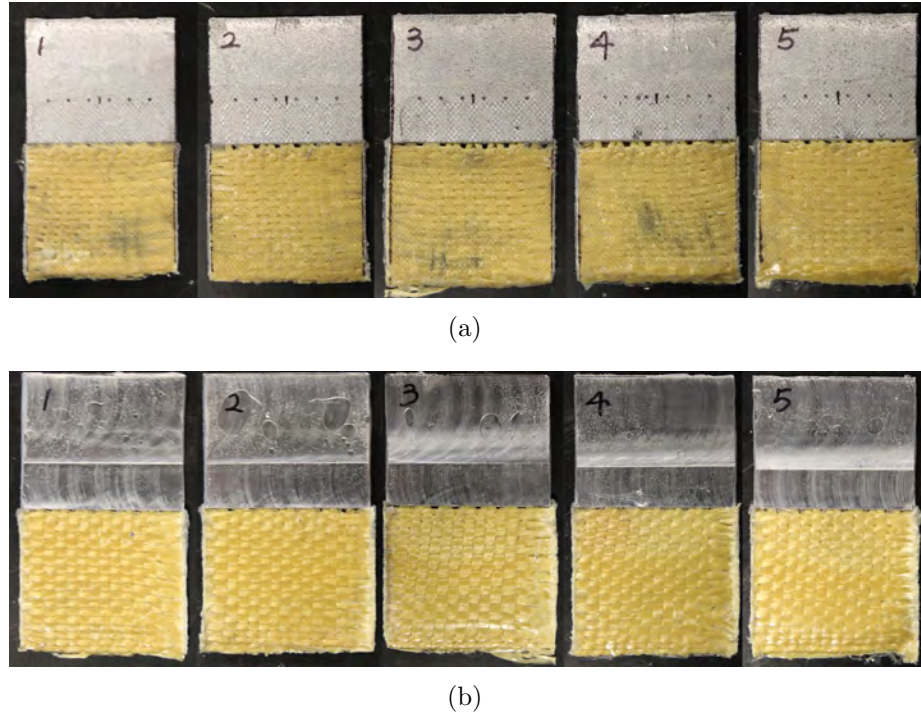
Pictures of tensile samples before testing. (a) front, (b) back.
